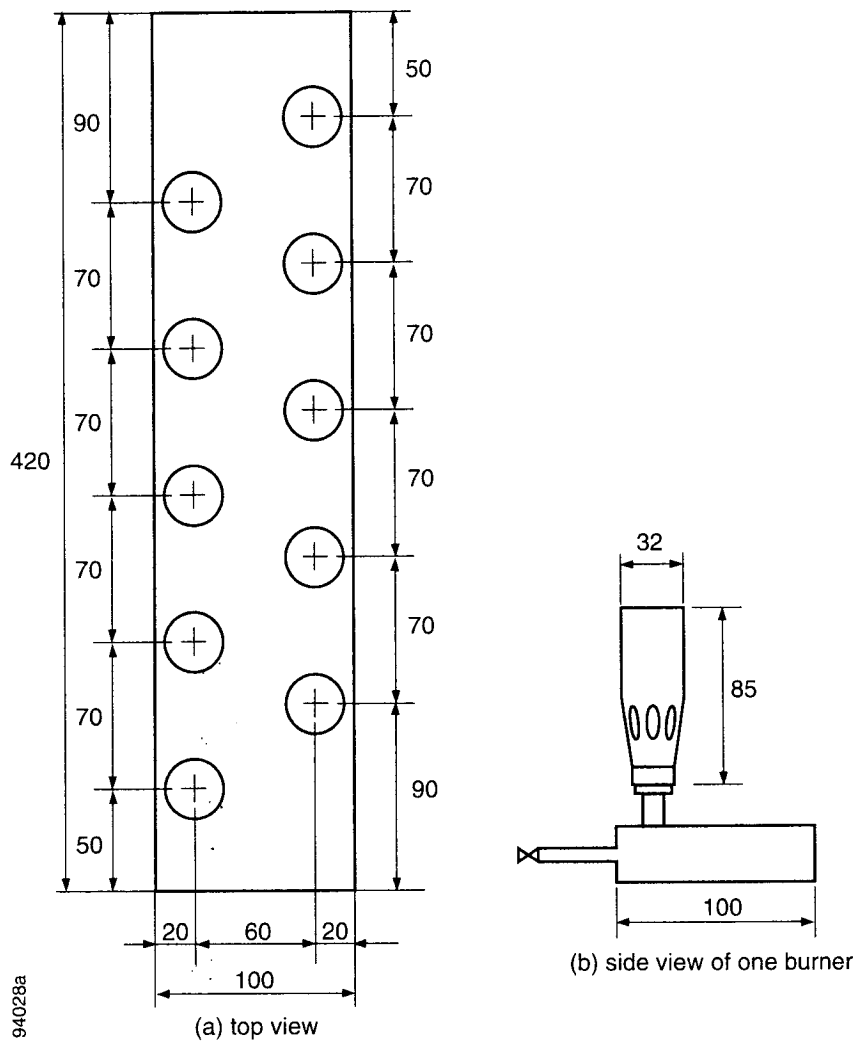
Fire endurance test: burner assembly (all dimensions in mm)
